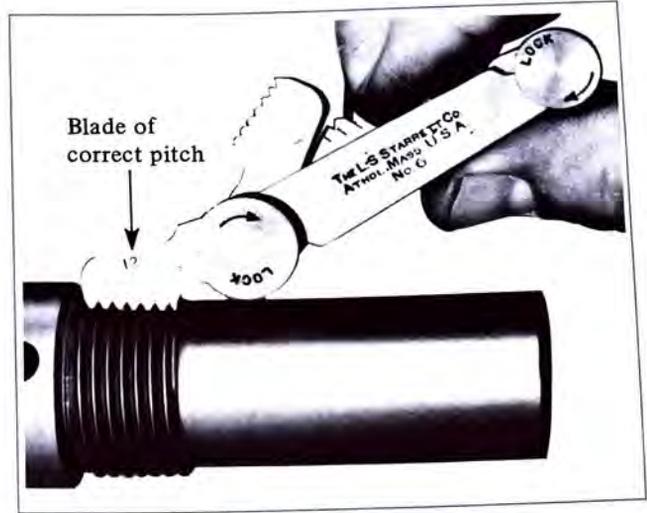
A Screw Pitch Gage Used to Determine Thread Pitch
